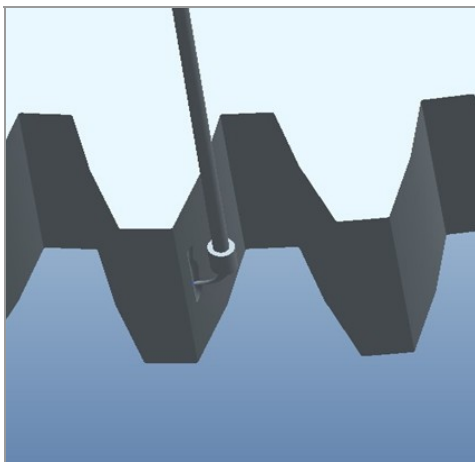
Welding gun moves along Z axis lead rail straightly that is negative gear width direction.
